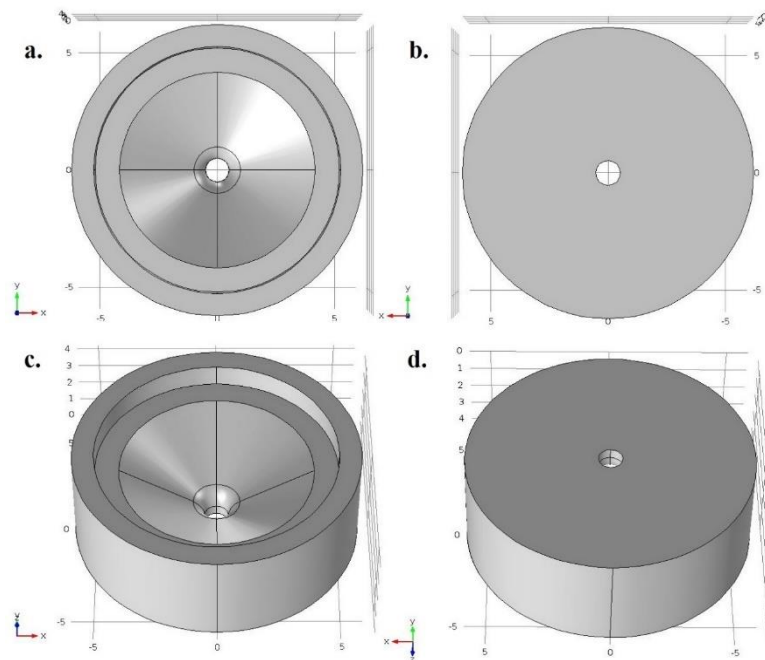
Schematic illustrations of top and bottom view of lower part of prototype 9, (a. top view, b. bottom view, c. top inclined view, d. bottom inclined view)
